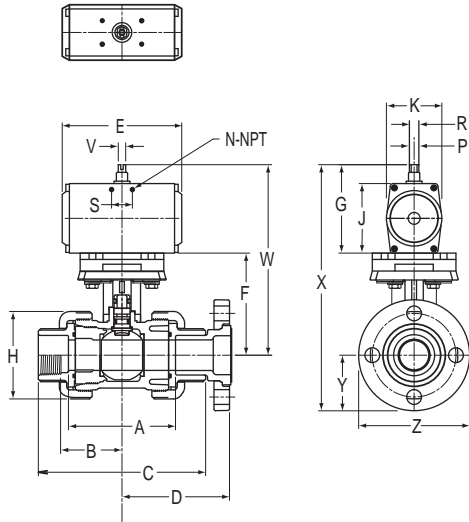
/2 TO 1-1/4- BALL VALVE
